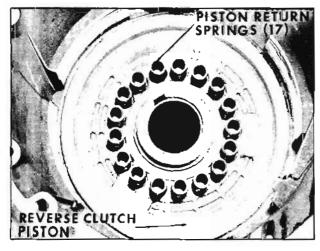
Removing Reverse Clutch Piston Return Springs
